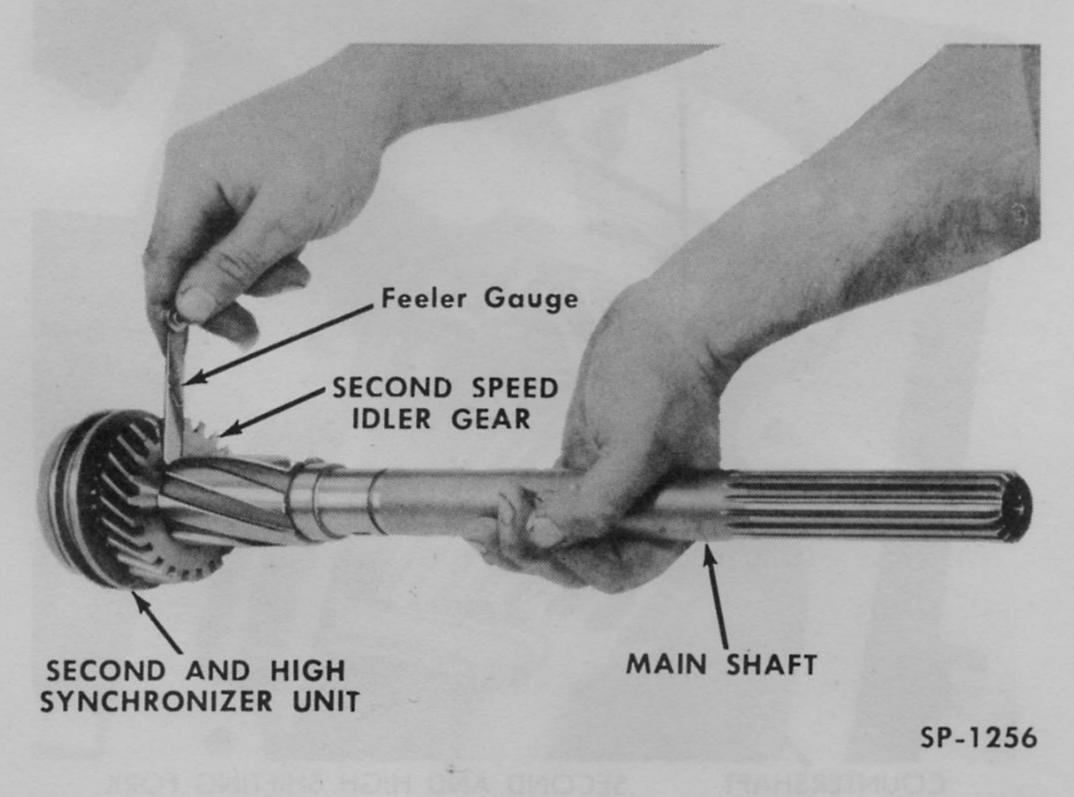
Checking Synchronizer And Second Speed Idler Gear End-Play
